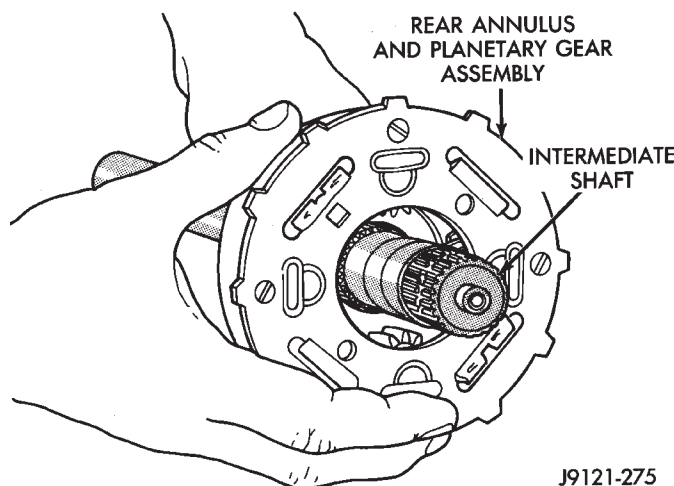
Installing Assembled Rear Annulus And Planetary Gear On Intermediate Shaft
